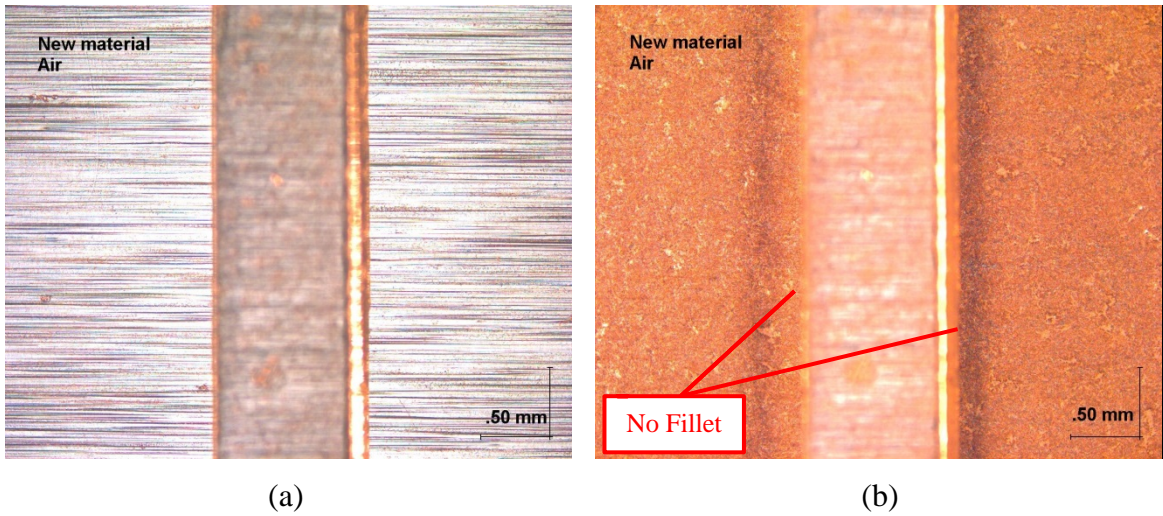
Trillium™ Brazing Sheet in Air (a) Before and (b) After the Brazing Process. Test I.
